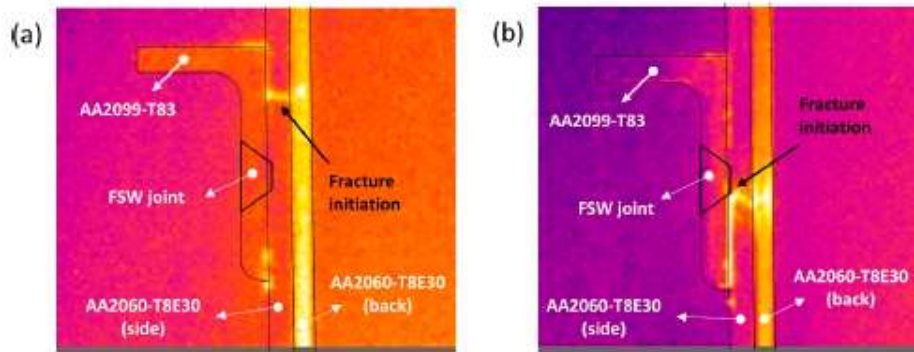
Thermographic images of FSW joints showing the instant of the fracture in the fatigue tests; (a) specimen C05_A showing the fracture out of the FSW joint at 216,817 cycles and (b) specimen C05_B showing the fracture in the HAZ at 52,306 cycles.
